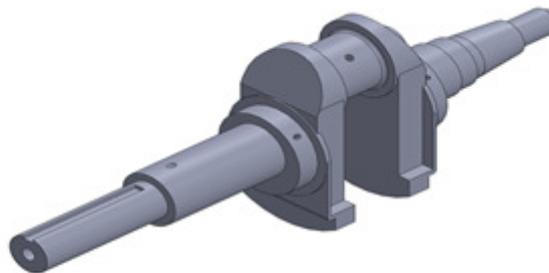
Model of Single Cylinder Crankshaft Drawn by Solidwork
